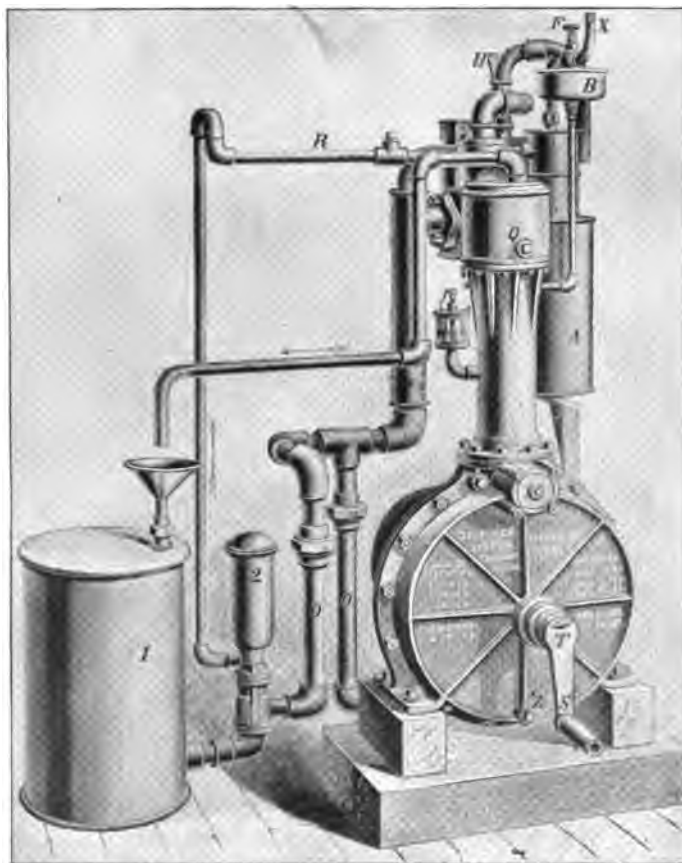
SINGLE-CYLINDER DAIMLER MOTOR, WITH COOLING WATER CIRCULATING PUMP.
